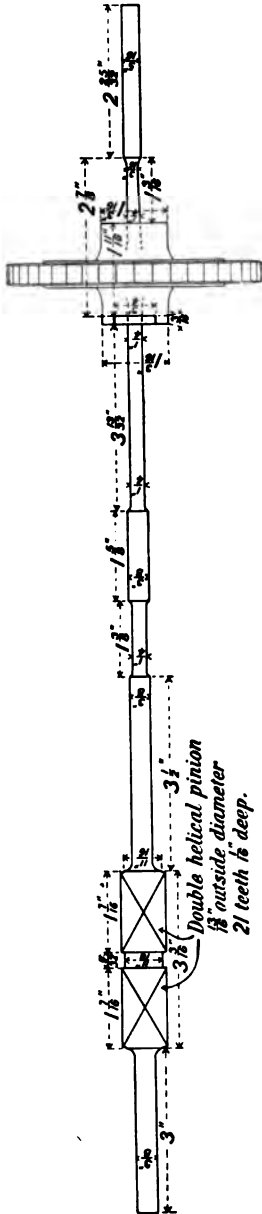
5 B.H.P. De Laval Turbine Wheel and Spindle.
